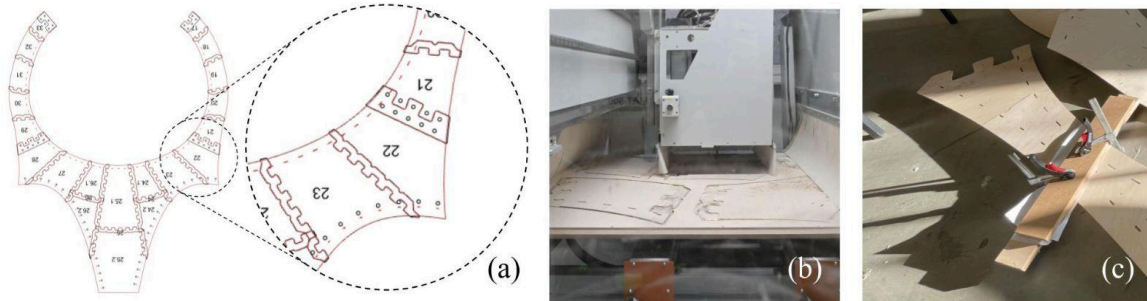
(a) Fabrication milling paths of a single module; (b) 3-axis CNC milling of the segments from plywood; (c) Gluing of individual segments.
